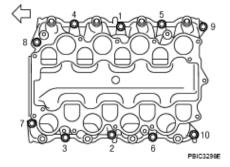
Identifying Intake Manifold Bolt Loosening Sequence (Lower) Courtesy of NISSAN MOTOR CO., U.S.A.
